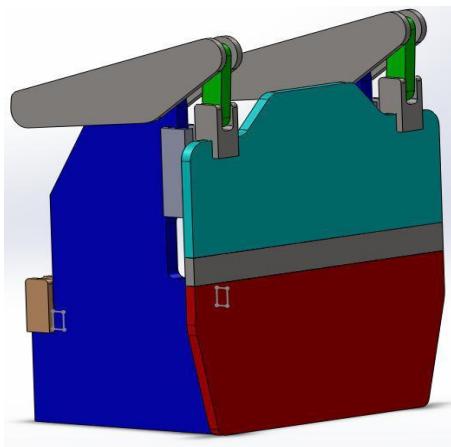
Shows 3D View of Hydraulic Press Brake.
